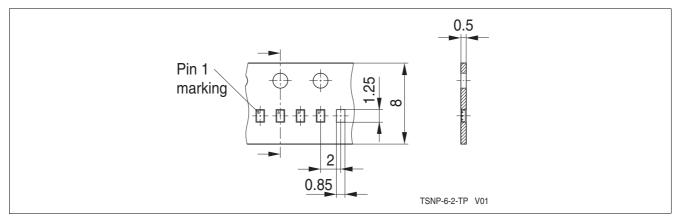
Tape & Reel Dimensions (reel diameter 180 mm, pieces/reel 15000)
